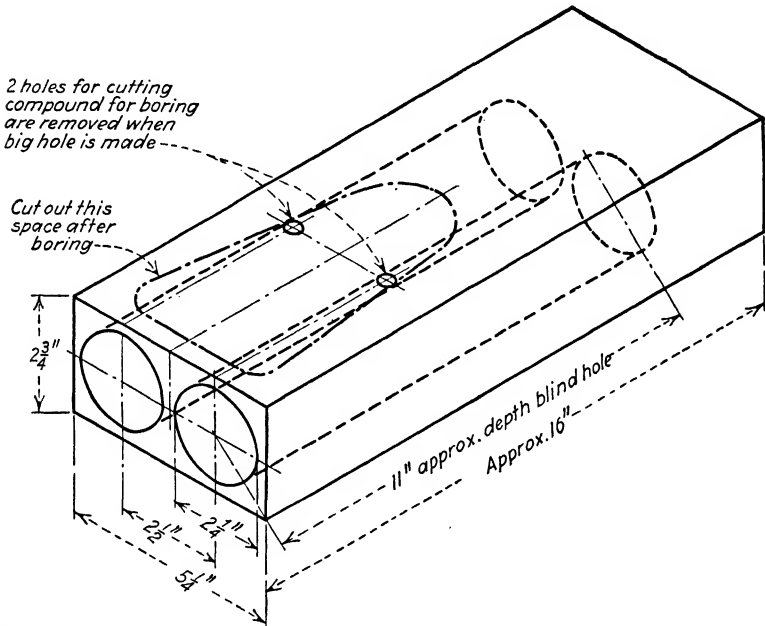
This job presented no growth or warpage complications, but chips caught between the coolant holes and the tool edges and spoiled the main holes.
